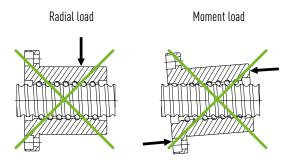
When installing the ballscrew, there must not be any radial or eccentric forces acting on the nuts or shafts.
